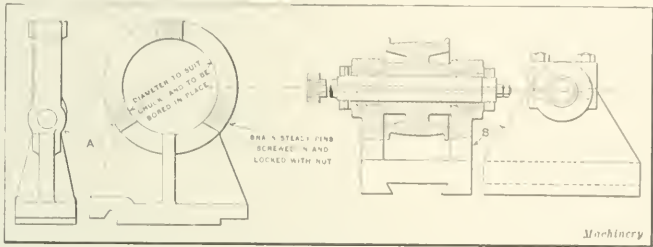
Steadyrest for supporting Work; and Sectional View through Milling Fixture
